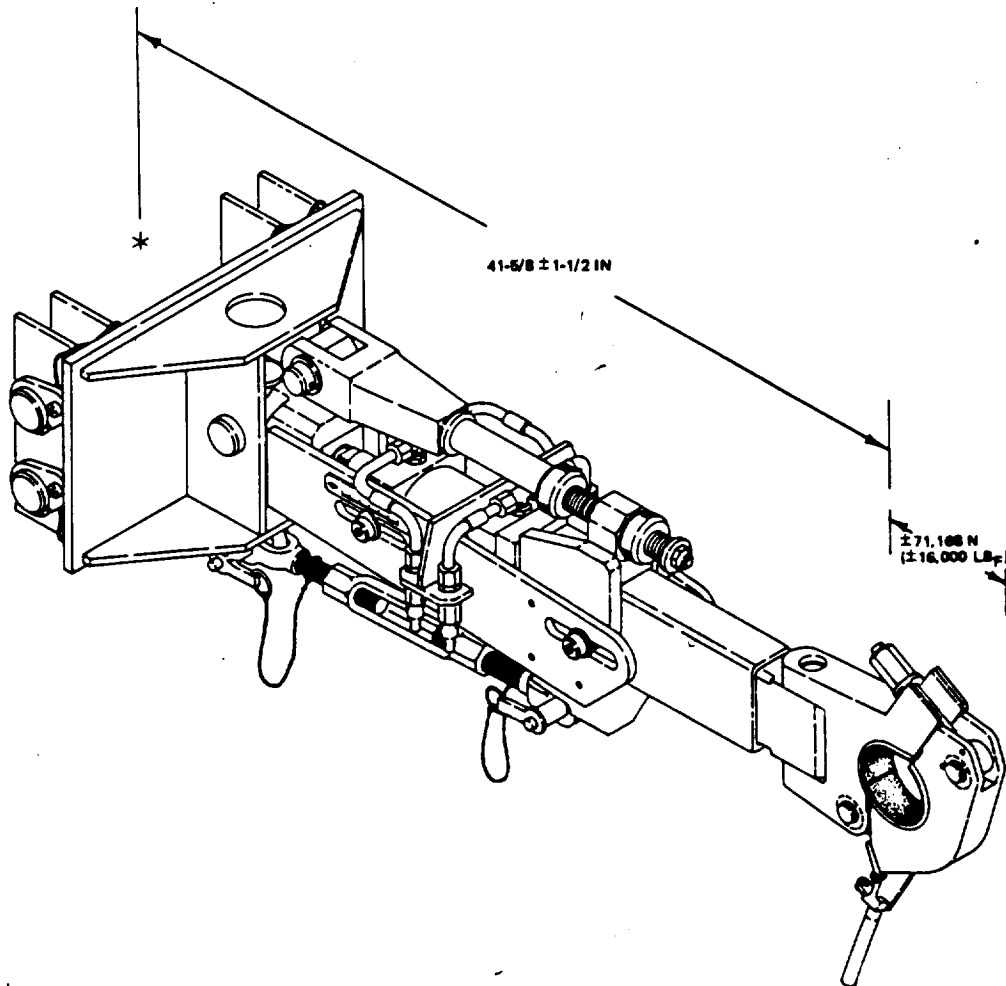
SECONDARY PAYLOAD SUPPORT FITTING MOUNTED TO SUPPORT BEAM
